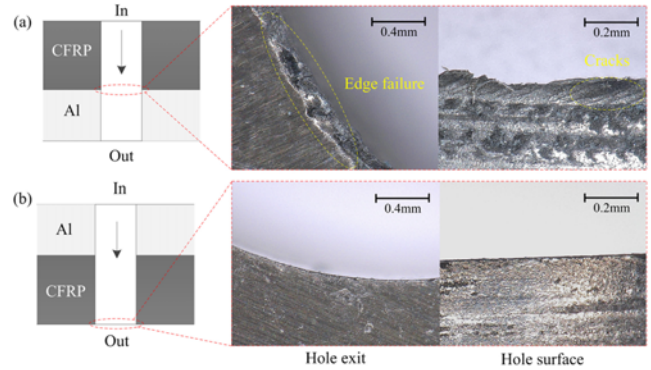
Hole surface of CFRP under the drilling parameters of $n = 1000$ rpm, $f = 0.08$ mm/rev. (a) Hole surface of CFRP drilling from CFRP to Al, (b) Hole surface of CFRP drilling from Al to CFRP
